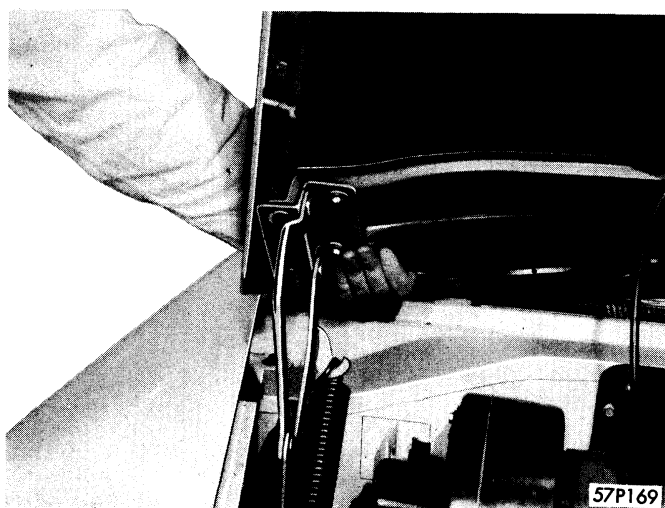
Moving Hood Forward to Obtain Clearance at Hood and Cowl
